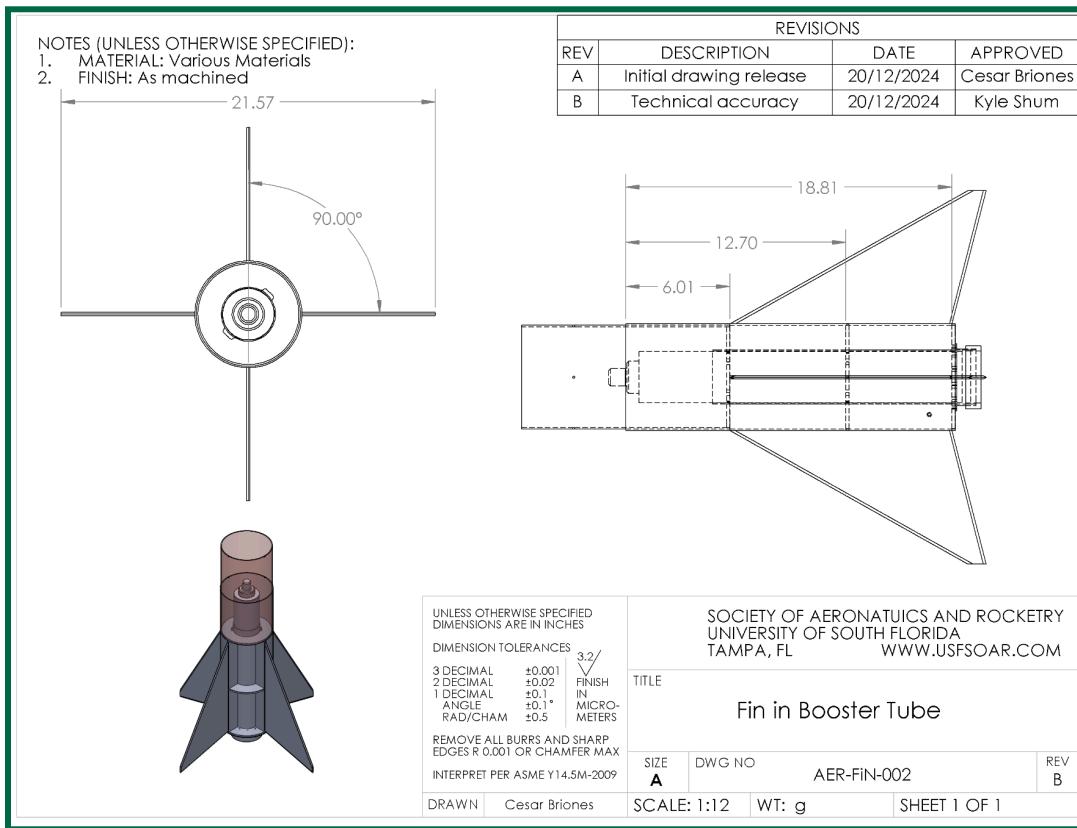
Fin Relative to the Booster Section Engineering Drawing
